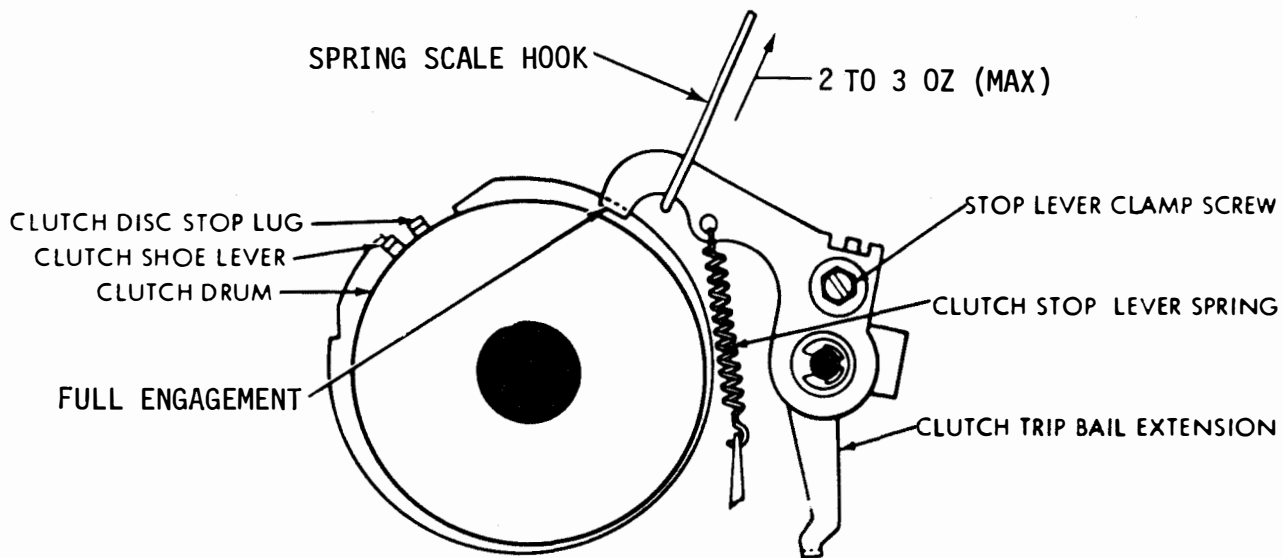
Clutch Stop Lever and Clutch Stop Lever Spring
